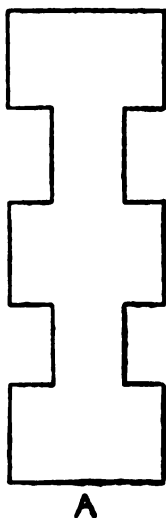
TEST SPECIMEN TO SHOW CARBURISATION BY GAS.
